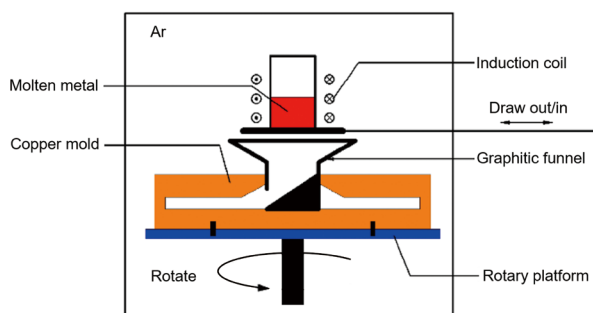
Schematic illustration of centrifugal casting equipment [21]
